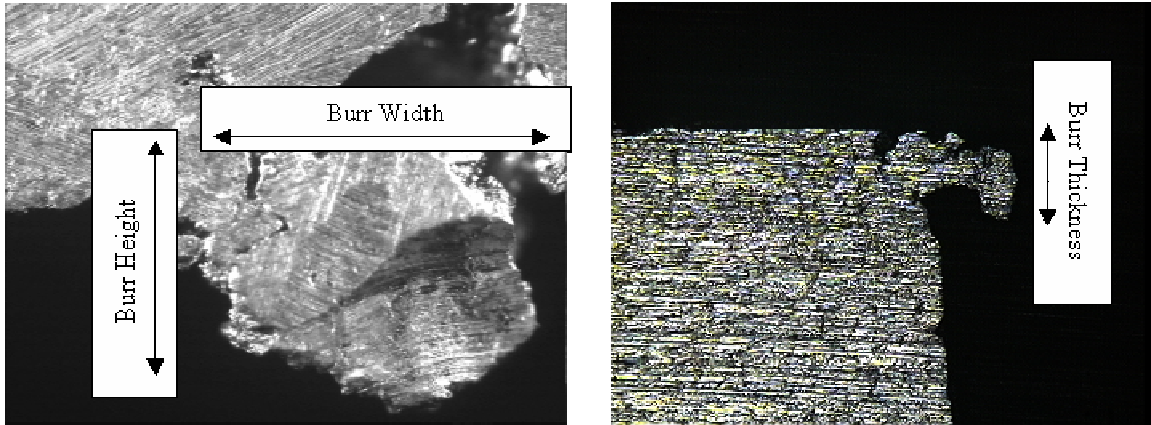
Burr obtained from face milling experiment and the definition of burr geometries
